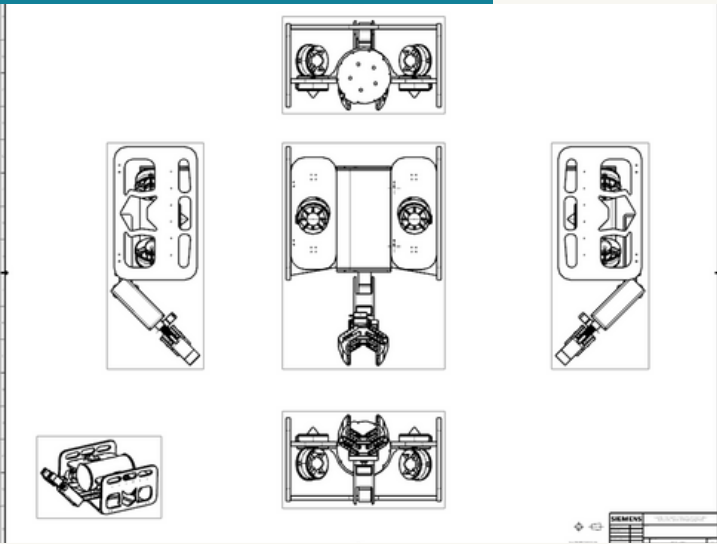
SeaFox-JSL Mechanical Design Drawing
